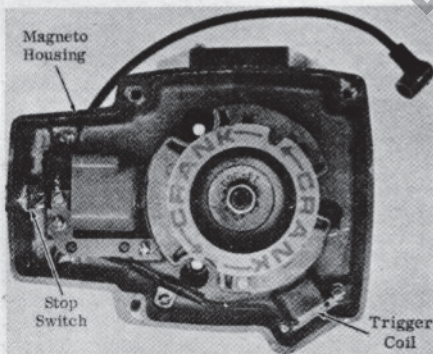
View of magneto assembly with rewind starter assembly removed. Armature to magneto rotor air gap and trigger coil to rotor air gap should be adjusted using a 0.0075 thick plastic shim.
